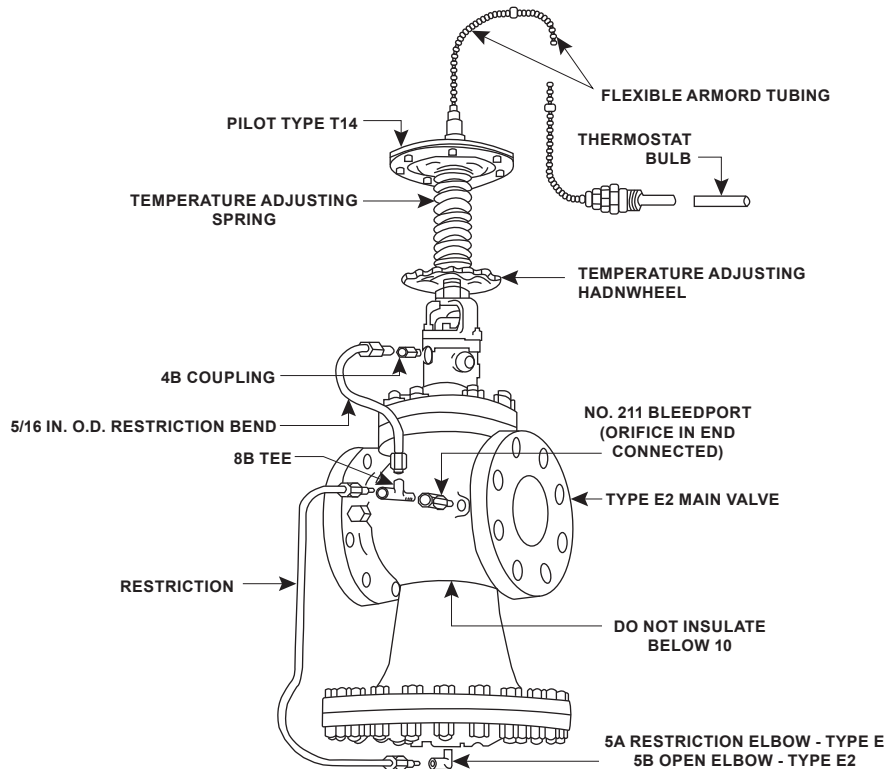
Type ET14 or E2T14 with Integrally Mounted Pilot Assembly Drawing
